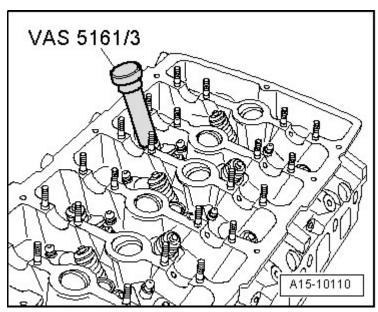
Placing Drift VAS 5161/3 On Valve Plate Courtesy of AUDI OF AMERICA, LLC
